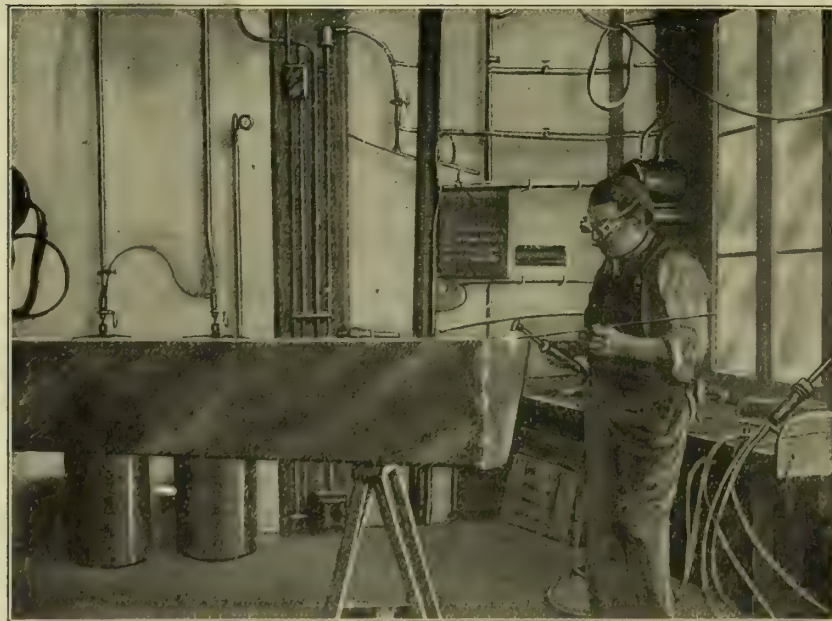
WELDING WITH BLOWPIPE.
